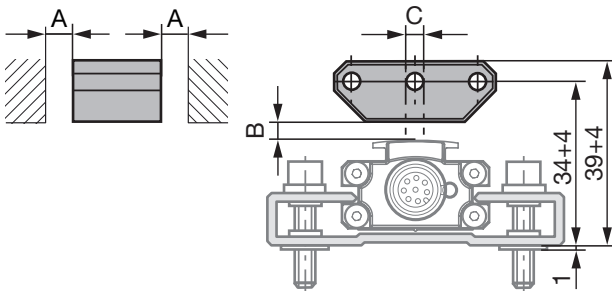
Dimensions and distances with BTL5-P-3800-2 magnet
